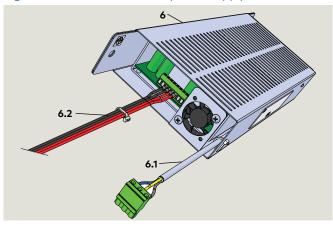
Motion Assist 360 power supply mounting mounting bracket
